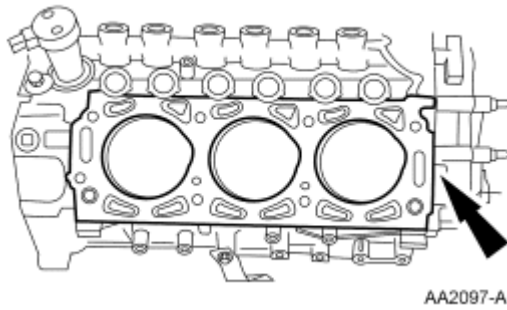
Locating Cylinder Head-To-Cylinder Block
